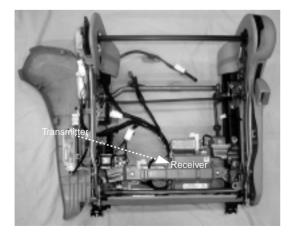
Appearance of seat-adjuster assembly using the developed module.
